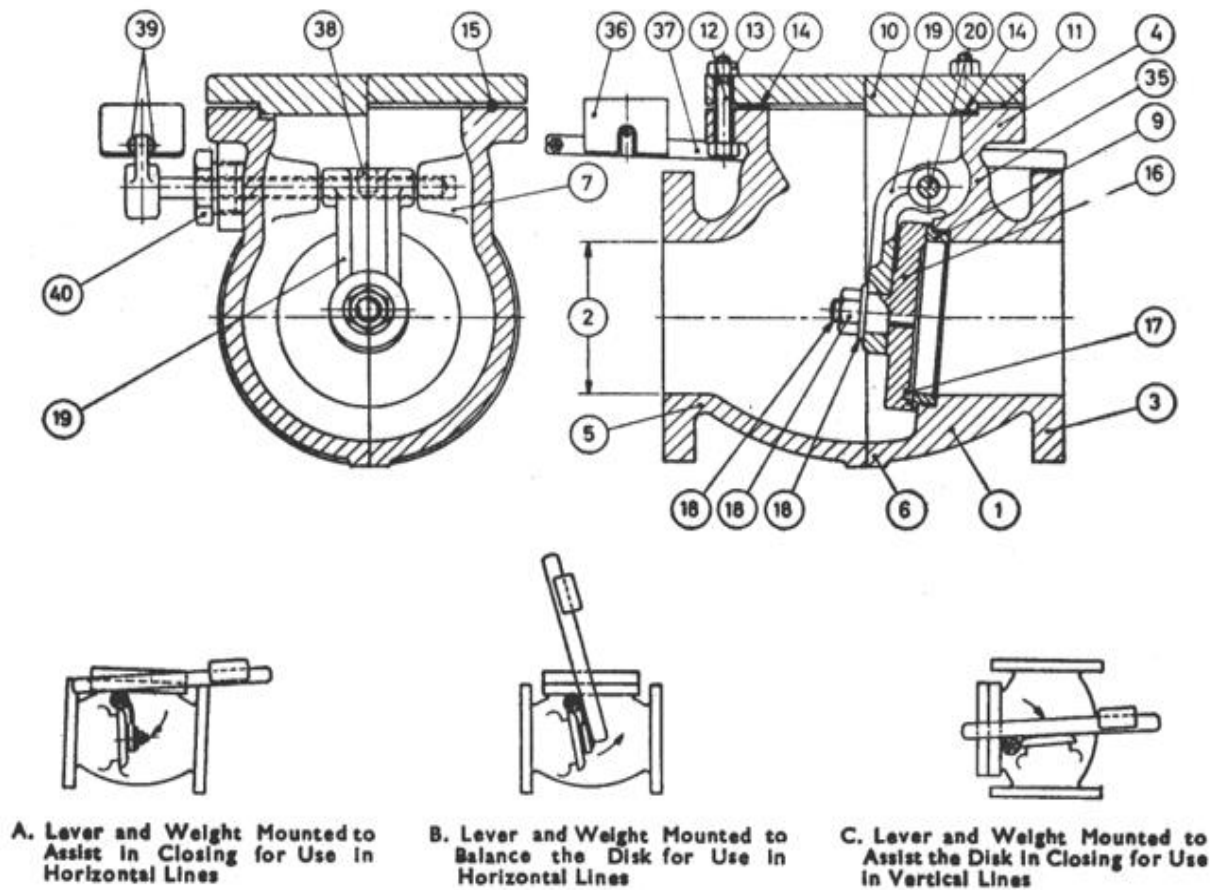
SWING CHECK VALVE WITH LEVER AND WEIGHT
